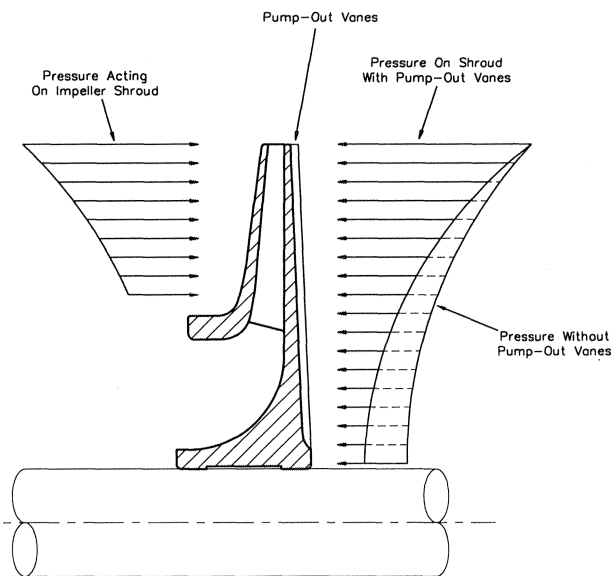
Pumpout Vanes used in a Single-Suction Impeller to Reduce Axial Thrust.
